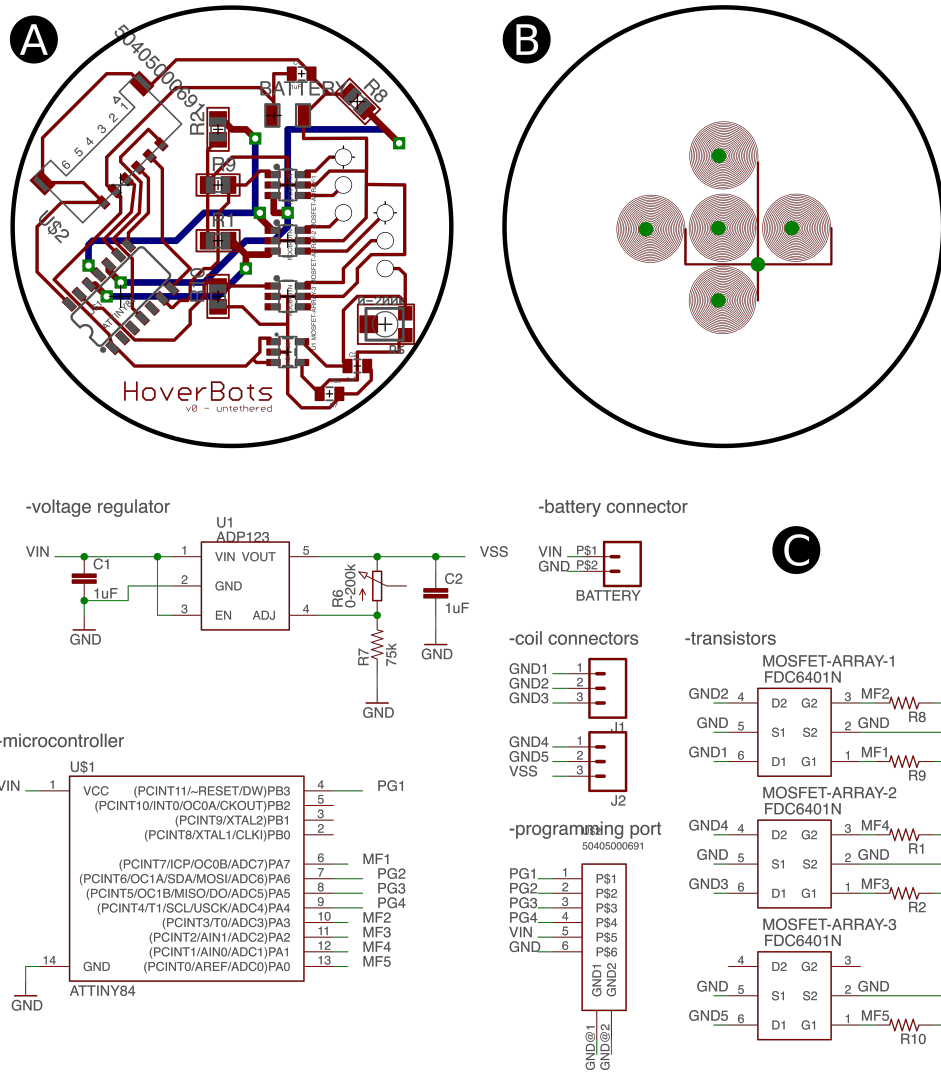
Untethered prototype schematic and board design. A) top PCB; B) bottom PCB; and C) schematic of the top PCB.
